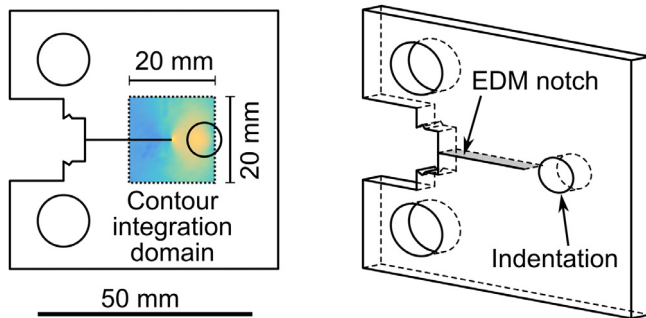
Geometry of the Compact (Tension) specimens used in fracture initiation tests.
